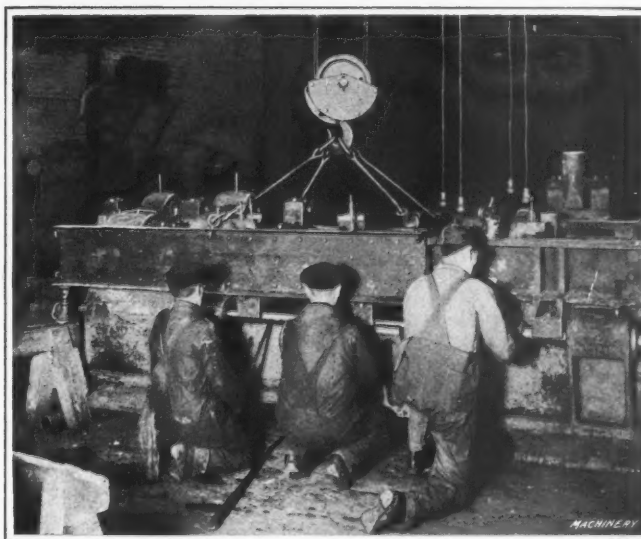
Putting One of the Hardened and Ground Steel Rods into Brackets on Casting. Notice Method of Location from Bearings on Jig
